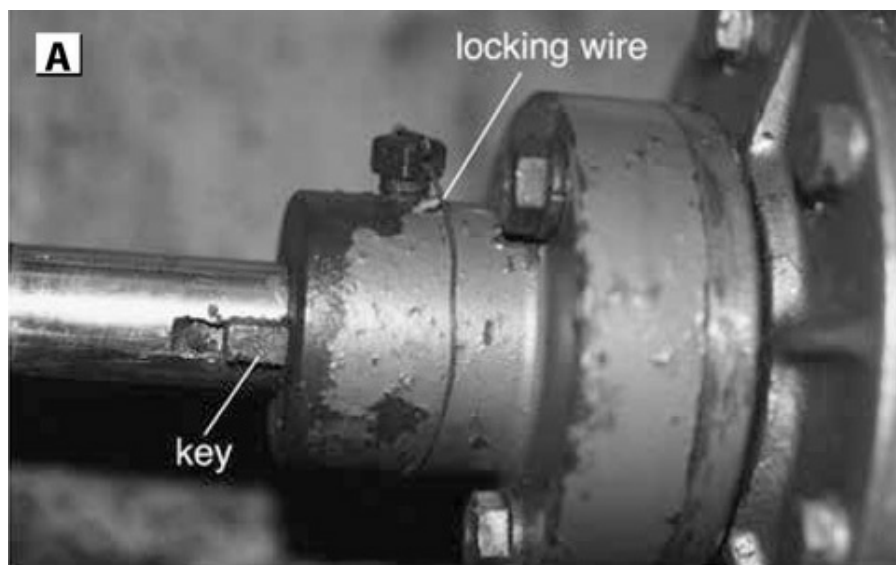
A. Shaft couplings should be keyed (as shown here), although
